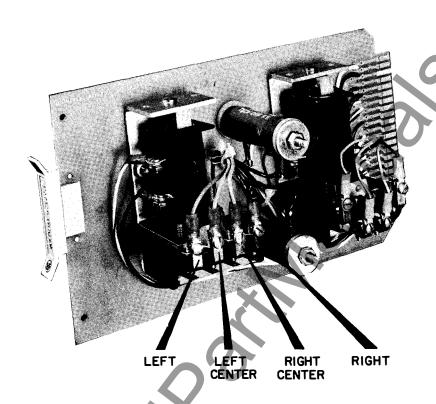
Model 67AR () Trip and Guard Relay Assembly.
